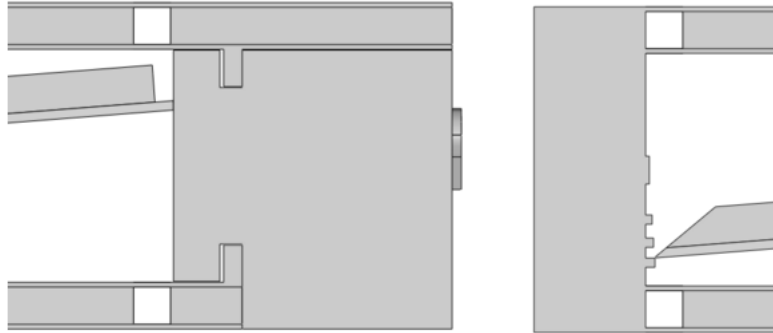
Jig rail interface (left) and jig stair tower mounting (right).
